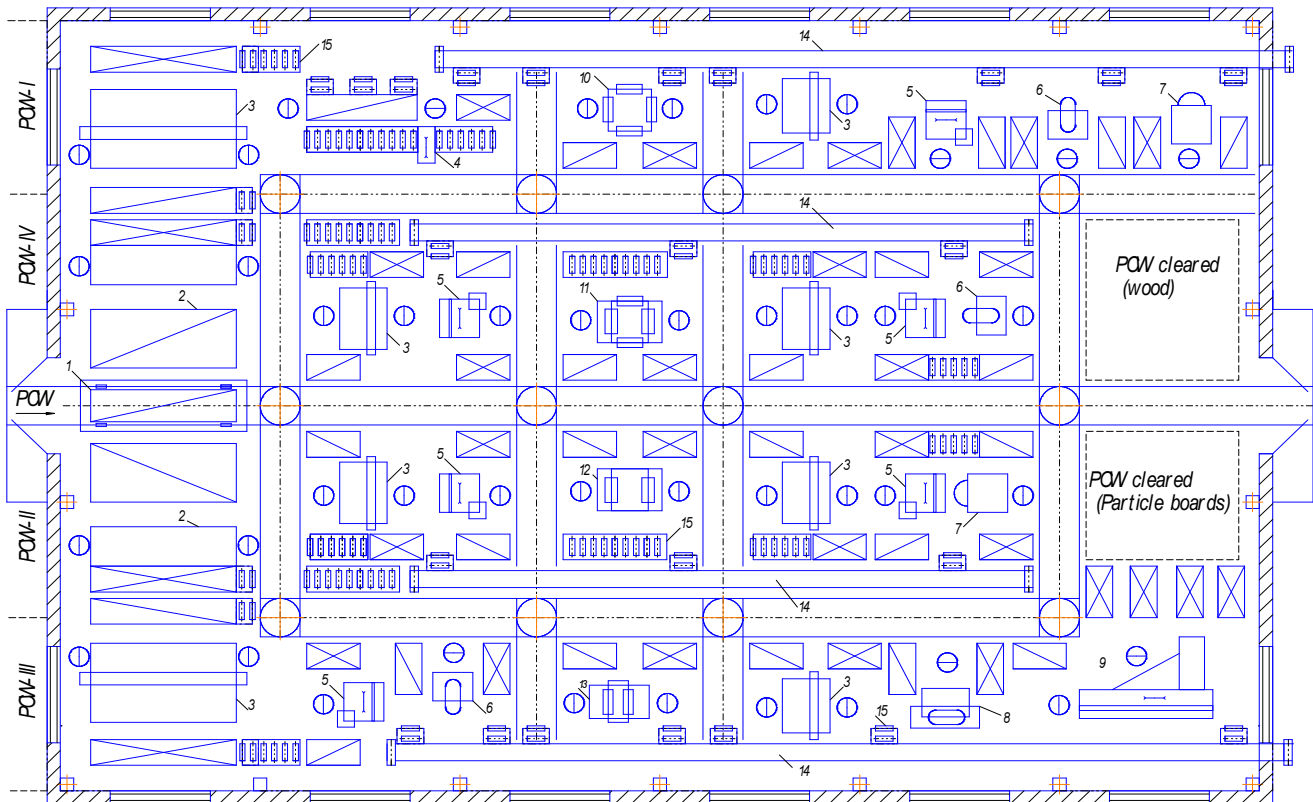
Equipment for PCW preparation – sorting, segregation and cleaning: 1 – traversing carriage; 2 – bench, worktable; 3 – metal detector; 4 – trimmer; 5 – circular saw; 6 – band mill; 7 – milling machine; 8 – enge sander; 9 – sizing machine; 10 – four-sided sander; 11 – four-sided needle milling machine; 12 – double-needle milling machine; 13 – double milling machine; 14 – conveyor; 15 – roller conveyor sections
